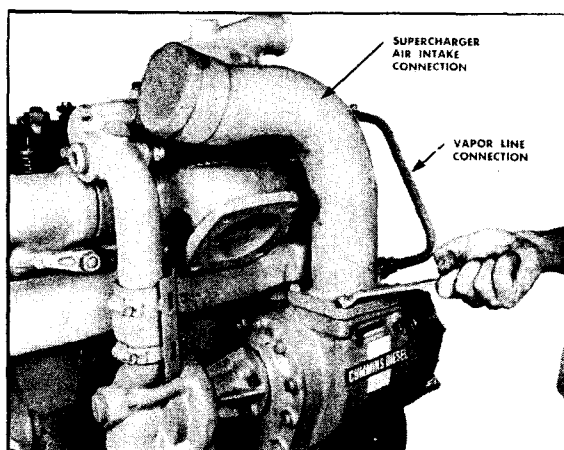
Assembling supercharger air intake and vapor line connection
